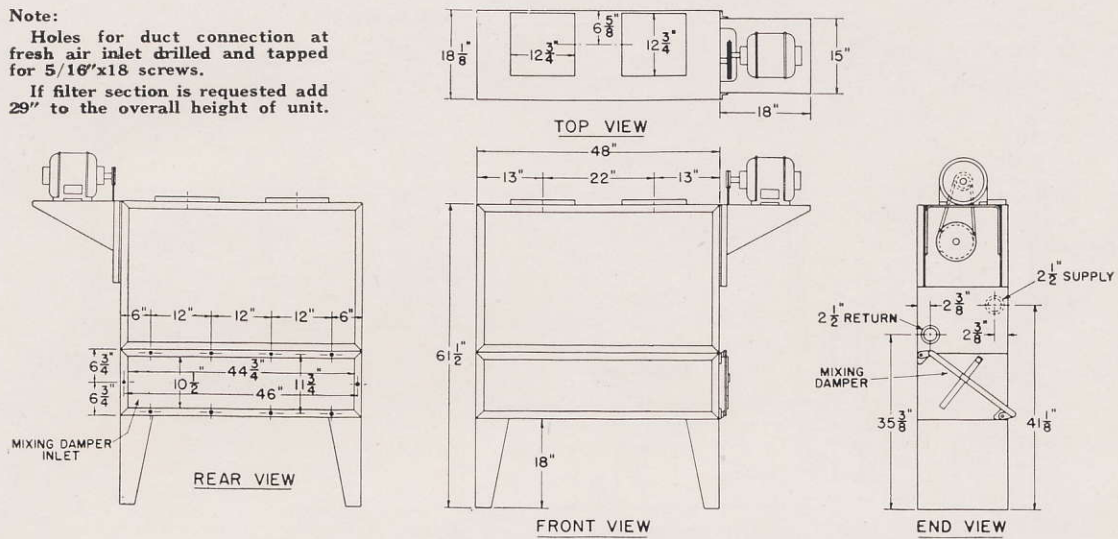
No. 1848 Type "R" Unit Heater. Floor Mounting. Mixing Damper.
